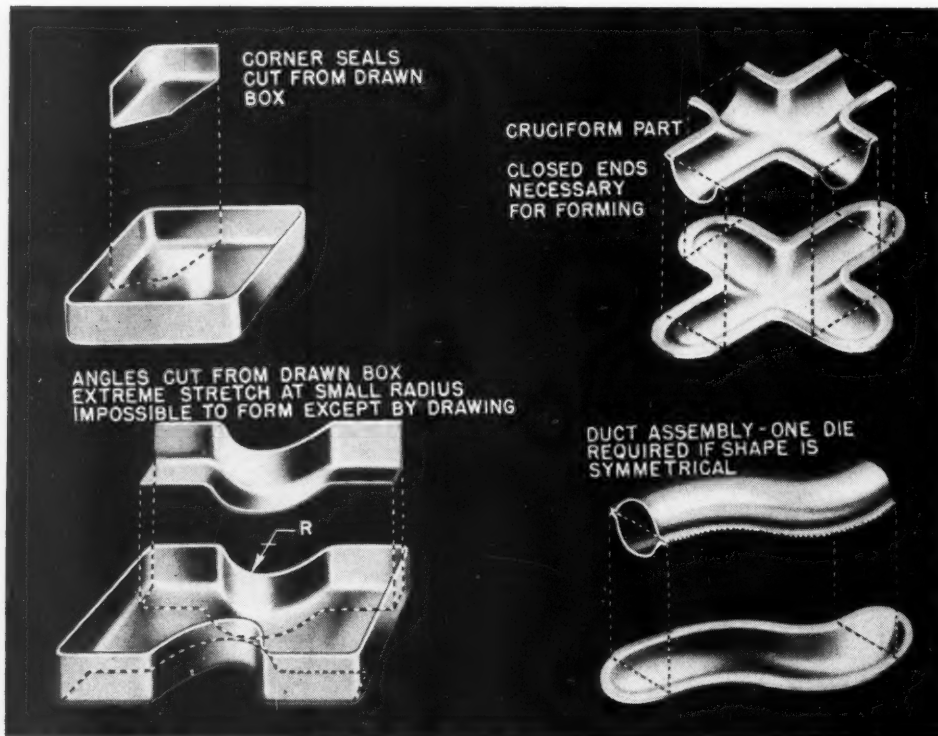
Odd-Shaped sheet-metal parts should be designed whenever possible to permit them to be cut from deep-drawn shapes
